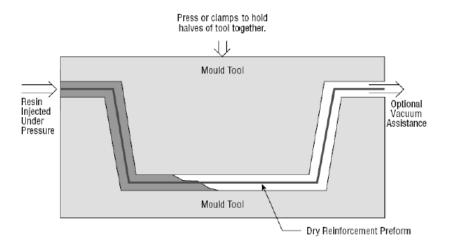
Schematic view of Resin Transfer (RTM) Molding Process [57]
